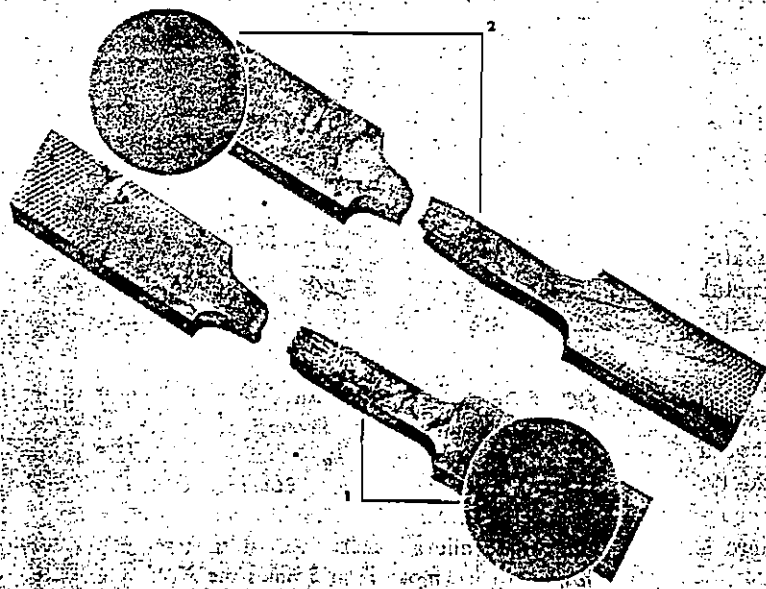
Excessive porosity (weld 1) as shown by radiograph did not weaken the joint. Weld 2 shows perfect. In both cases the weld was stronger than the plate. Specimens broke in the plate at approximately 60,100 psi.
